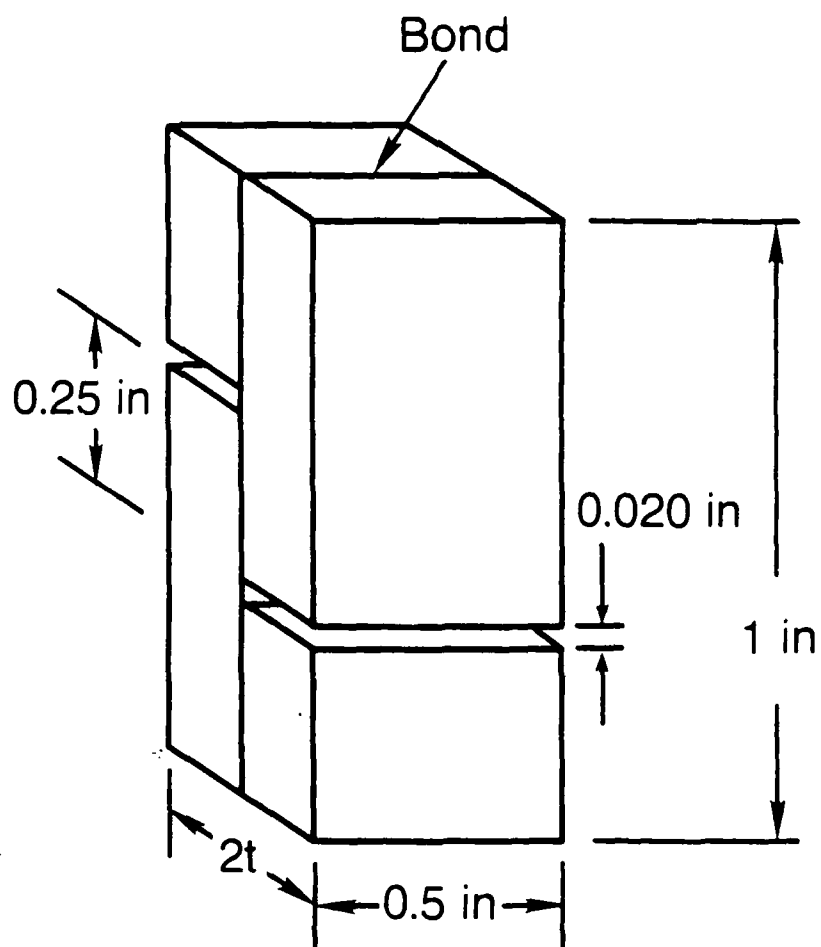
GEOMETRY OF DOUBLE-NOTCH SHEAR SPECIMENS
